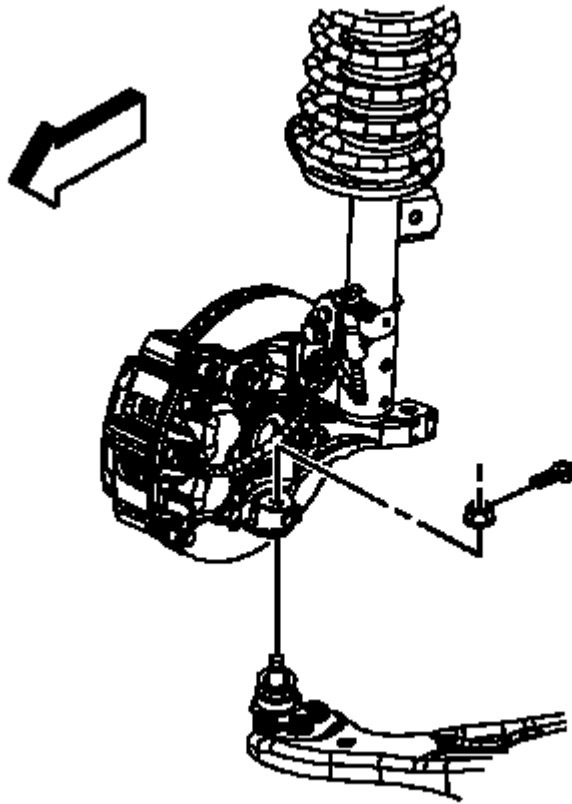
View Of Lower Ball Joint At Steering Knuckle
